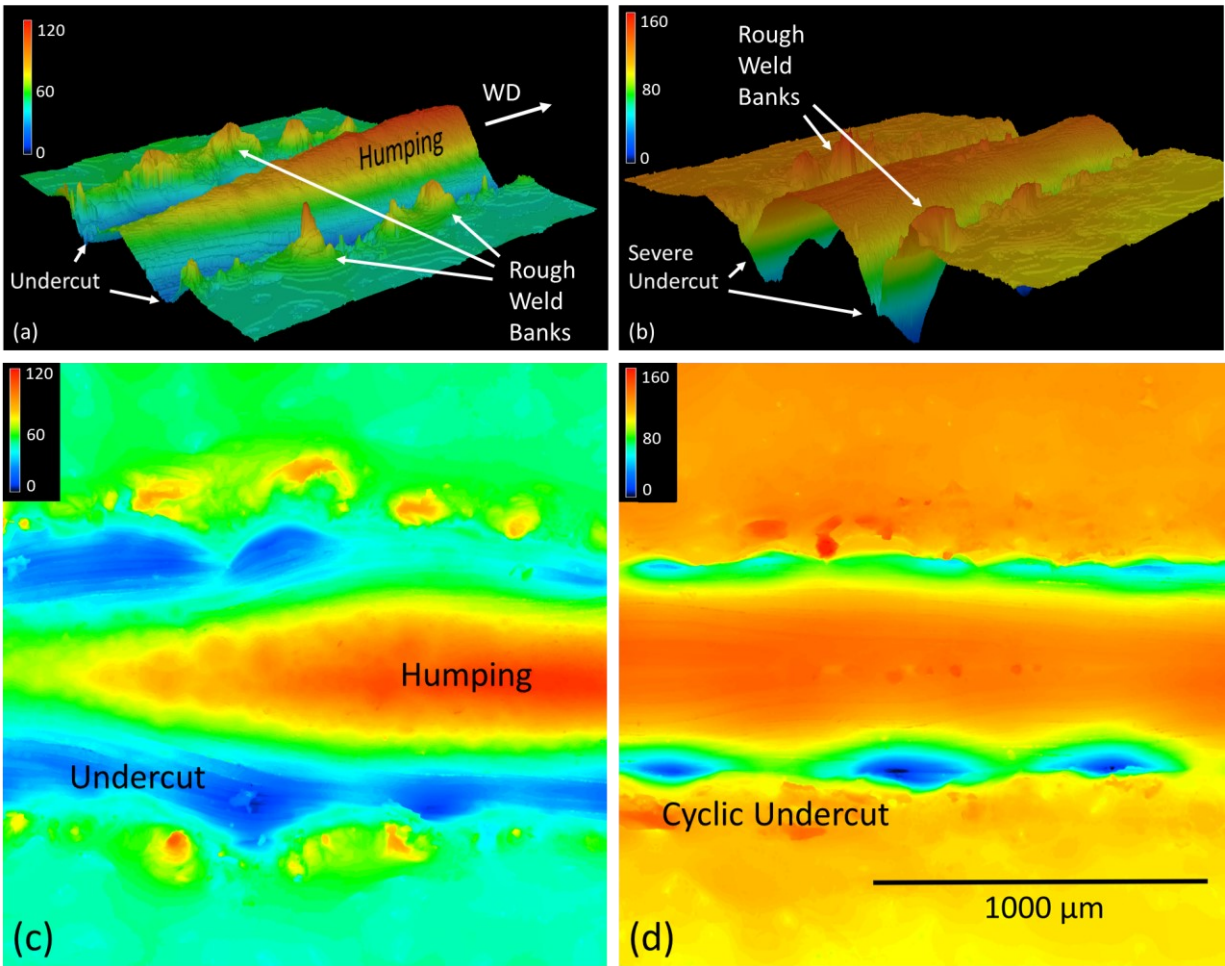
3D laser profile of the (a) top and (b) bottom surfaces of the weld in the PBC showing elevated or rough weld banks that form as a result of the deposition of some molten material from the weld pool. This loss of material leads to the observable undercut at the top and bottom surfaces; although the depth of the defect is almost double at the bottom surface ($\approx 120 \mu\text{m}$) compared to the top ($\approx 60 \mu\text{m}$). 2D height maps of the (c) top and (d) bottom surfaces of the weld in the PBC showing elevated weld banks caused by the deposition of molten material at the weld seam leading to considerable undercut at both the surfaces. Although the depth of the defect was much larger at the bottom surface, the defect was not consistent and appeared to be cyclic in nature. The undercut was not as severe at the top surface but presented itself as a consistent feature of the surface profile and weld geometry. Color scale bars have a unit of μm . (WD: Welding Direction)
